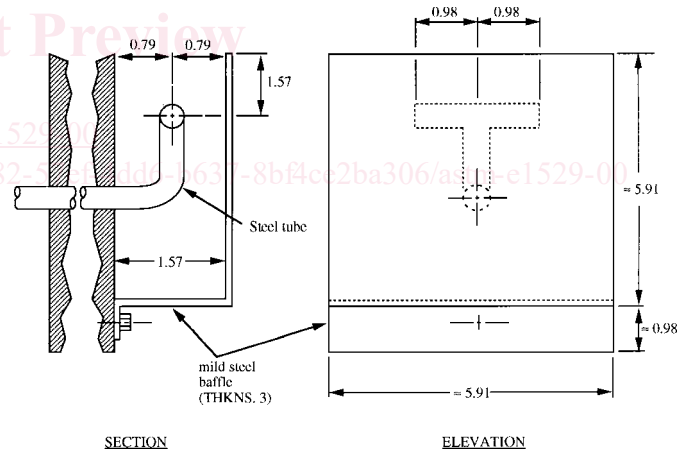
Static Pressure-Measuring Device Dimensions in Millimetres
